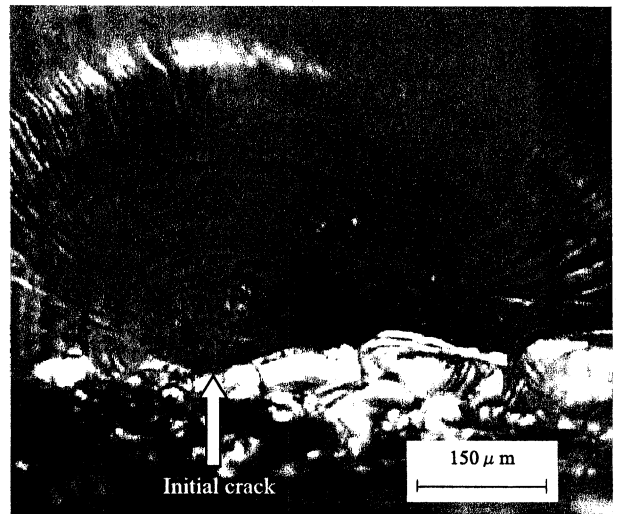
Fatigue fracture morphology observed with an optical microscope of PSA surface fractured at $N=10^6$
